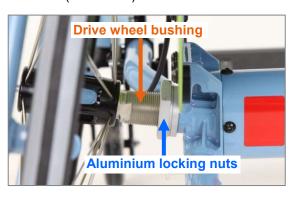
Drive wheel bushing and aluminium locking nut (rear view)
